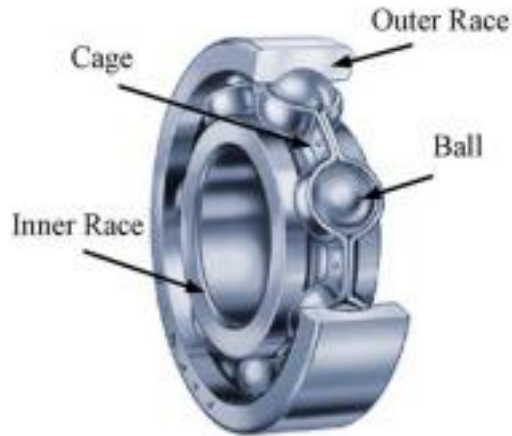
Ball bearing (Izzet, et al, 2008)
